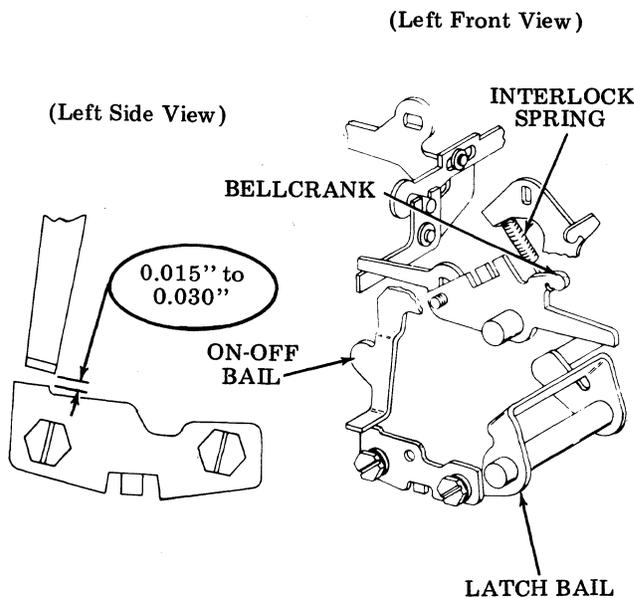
Lever and Latch Bail Gap Adjustment (185703 Modification Kit)
